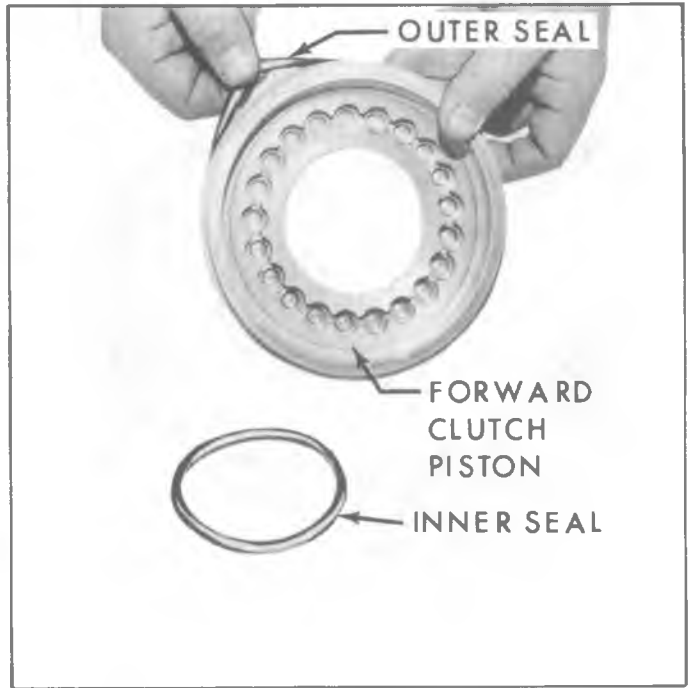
M—Removing Forward Clutch Piston Inner and Outer Seals
